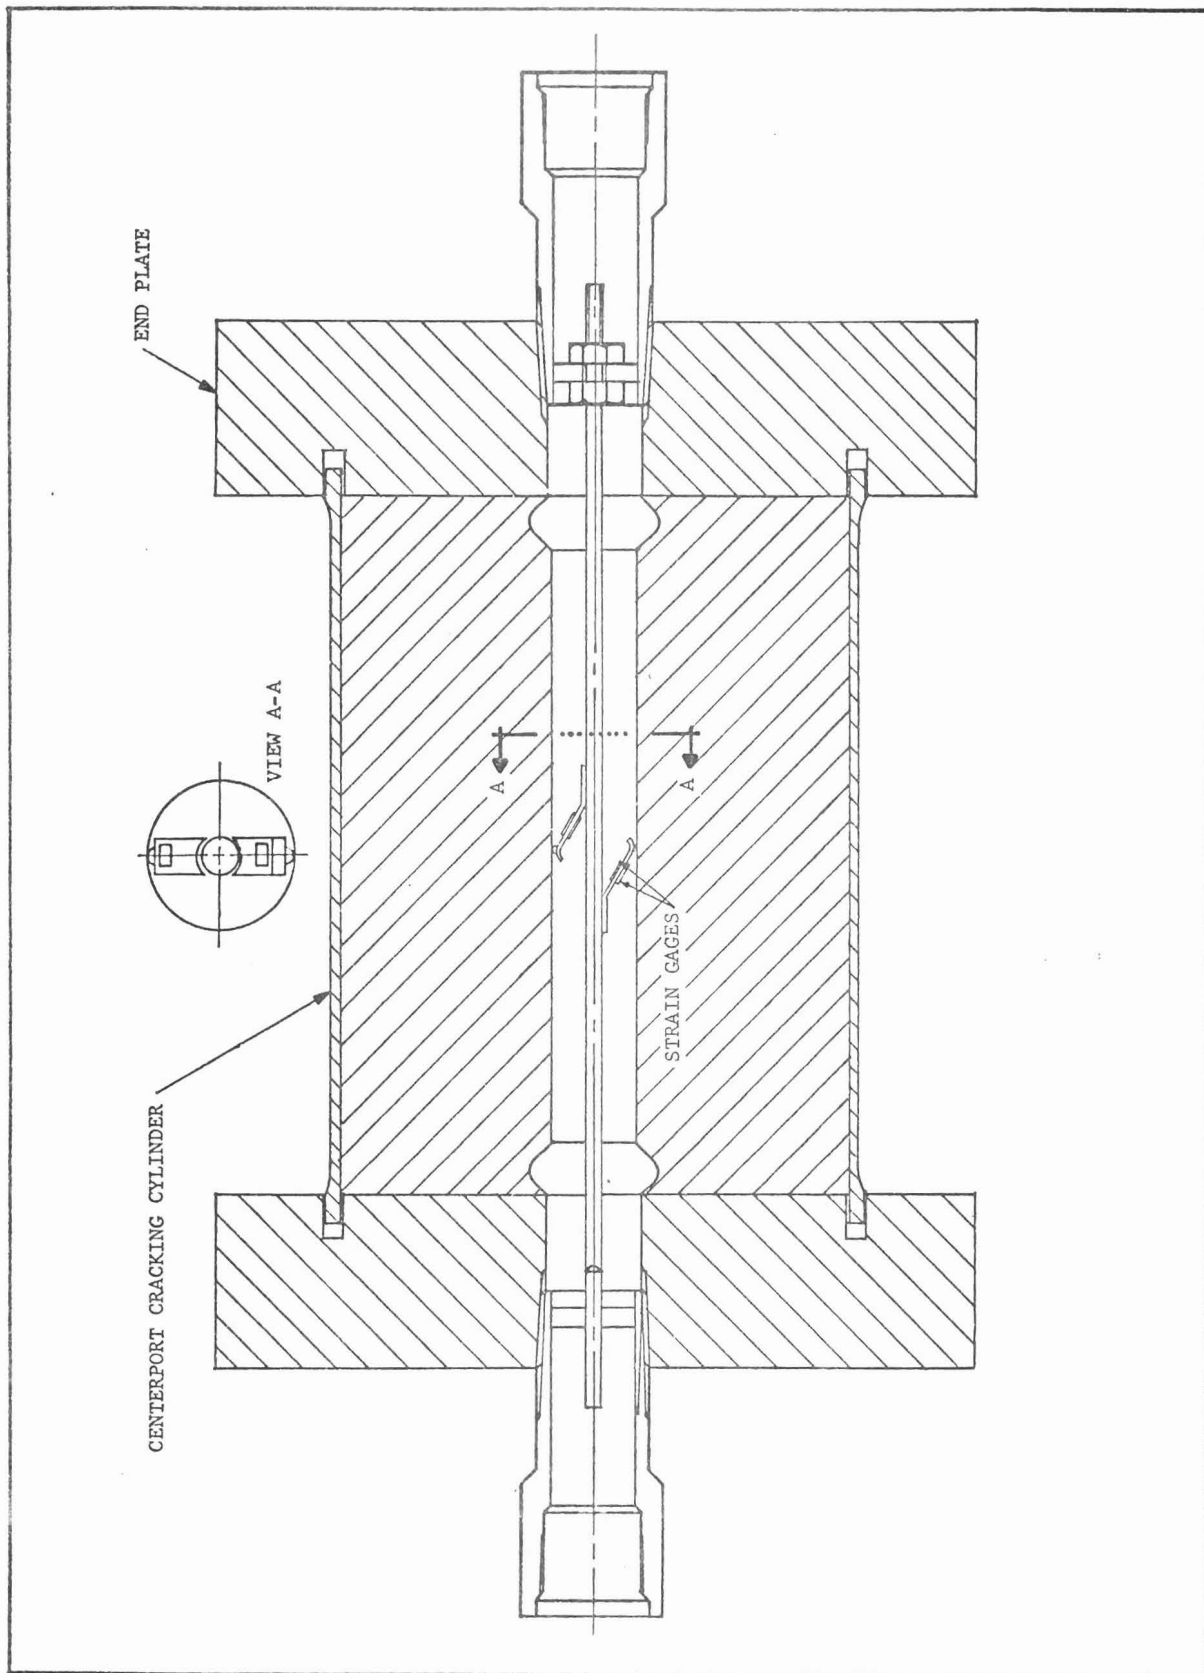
Leaf Deflectometer Assembly for Centerport Cracking Cylinder Test
